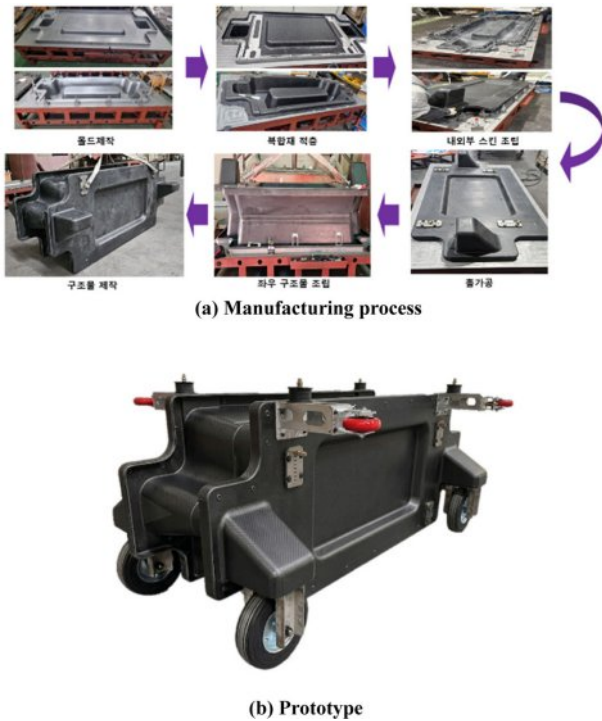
Manufacturing process and fabricated prototype of the composite bogie frame
